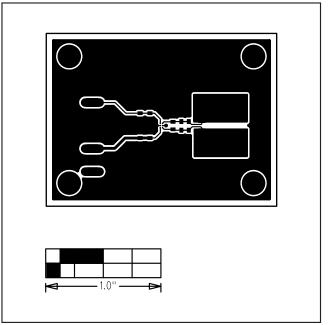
MAX9928 EV Kit PCB Layout—Component Side
